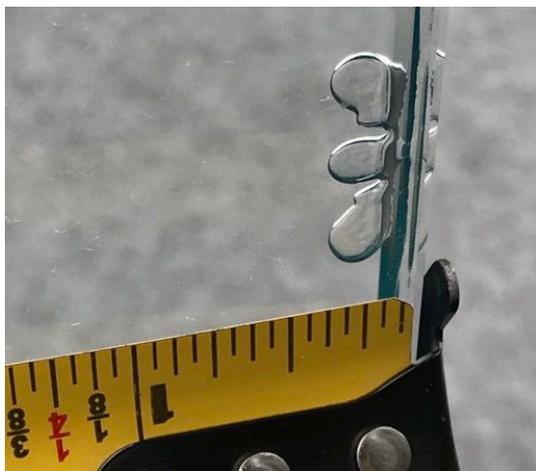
Zoom-in detail example of three air bubbles located at an edge.
